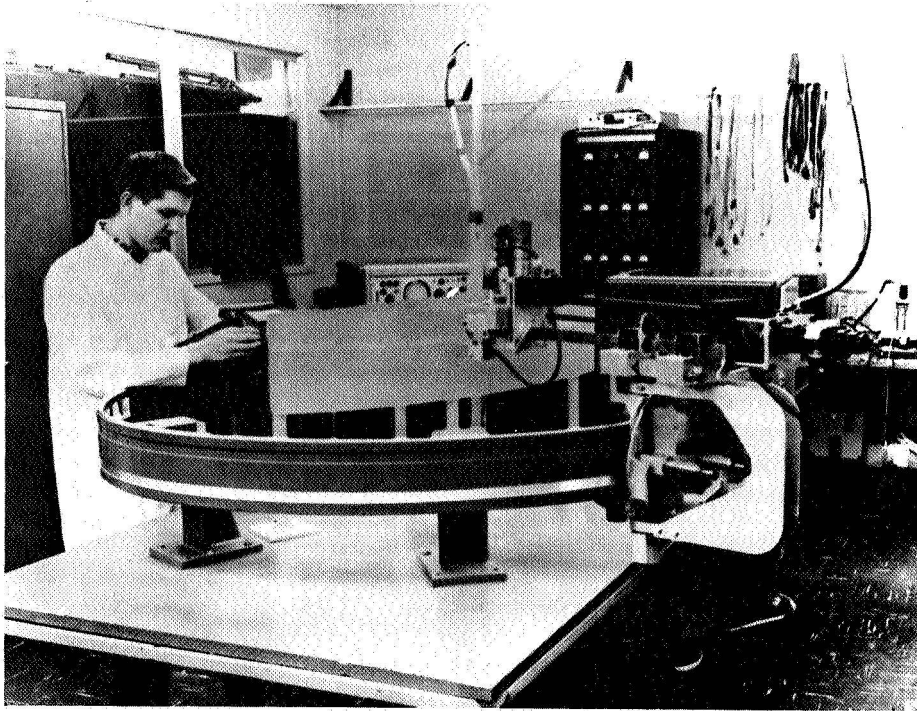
Prototype lab model, Mark I weld skate.
